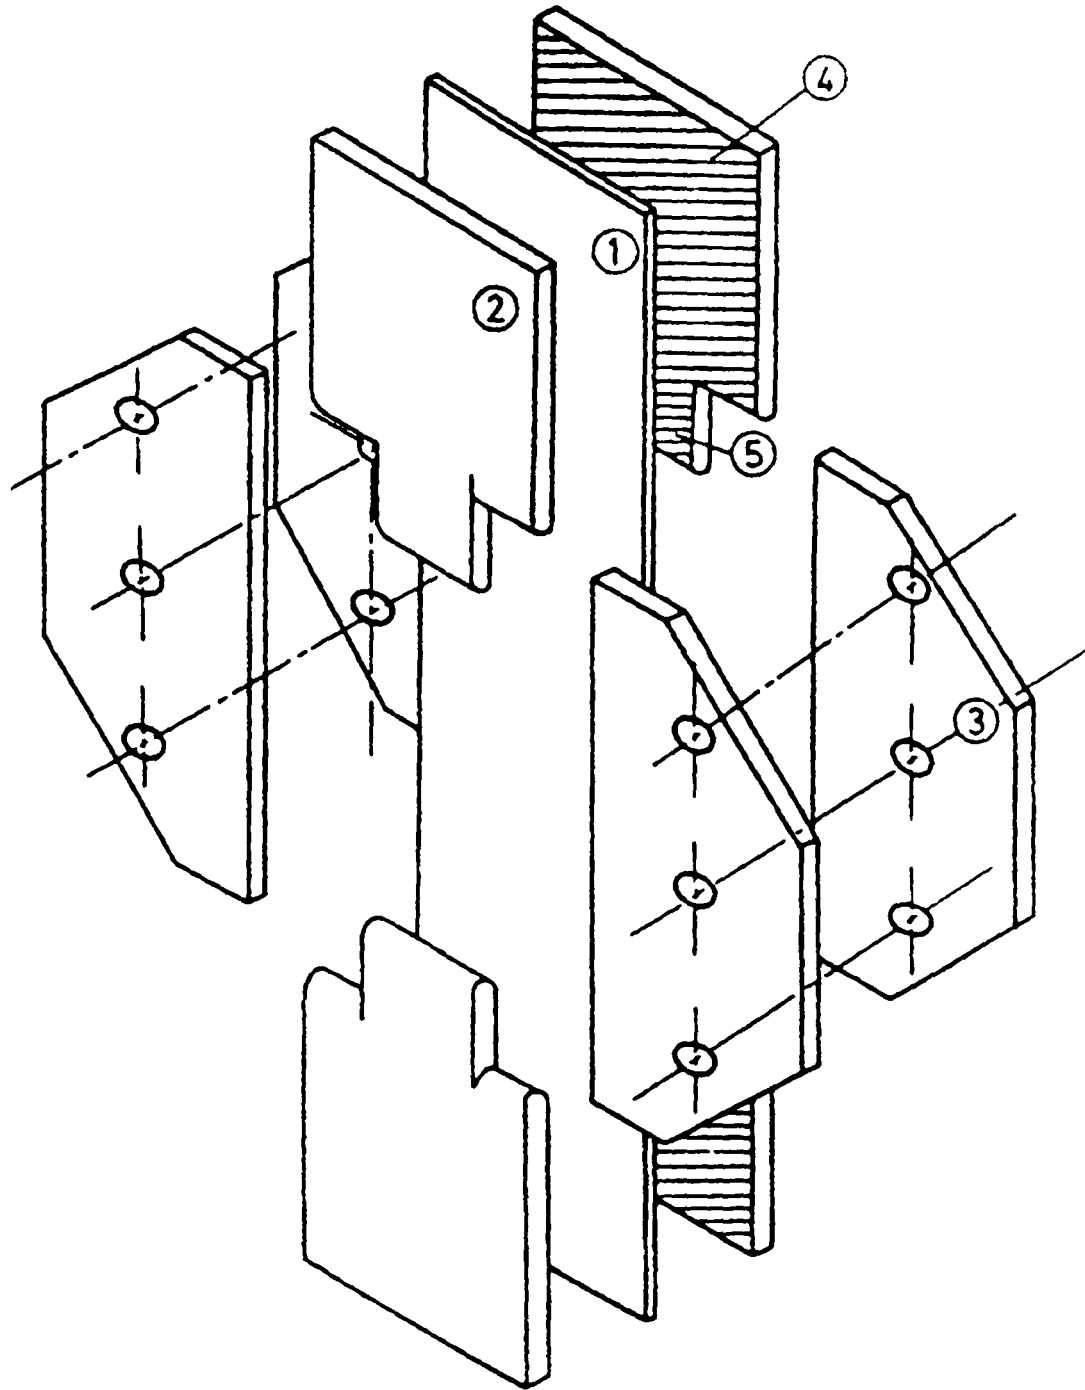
Exploded view of ONERA anti - Buckling guide (113).
